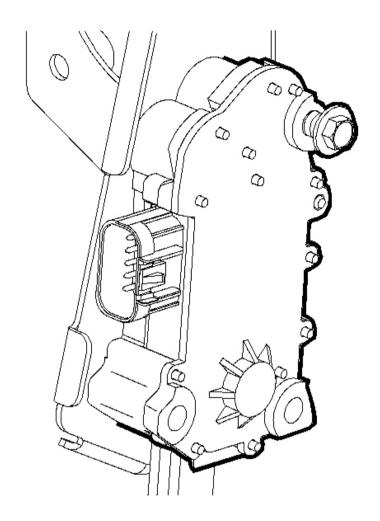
View Of APP Assembly From The Vehicle Courtesy of GENERAL MOTORS CORP.
